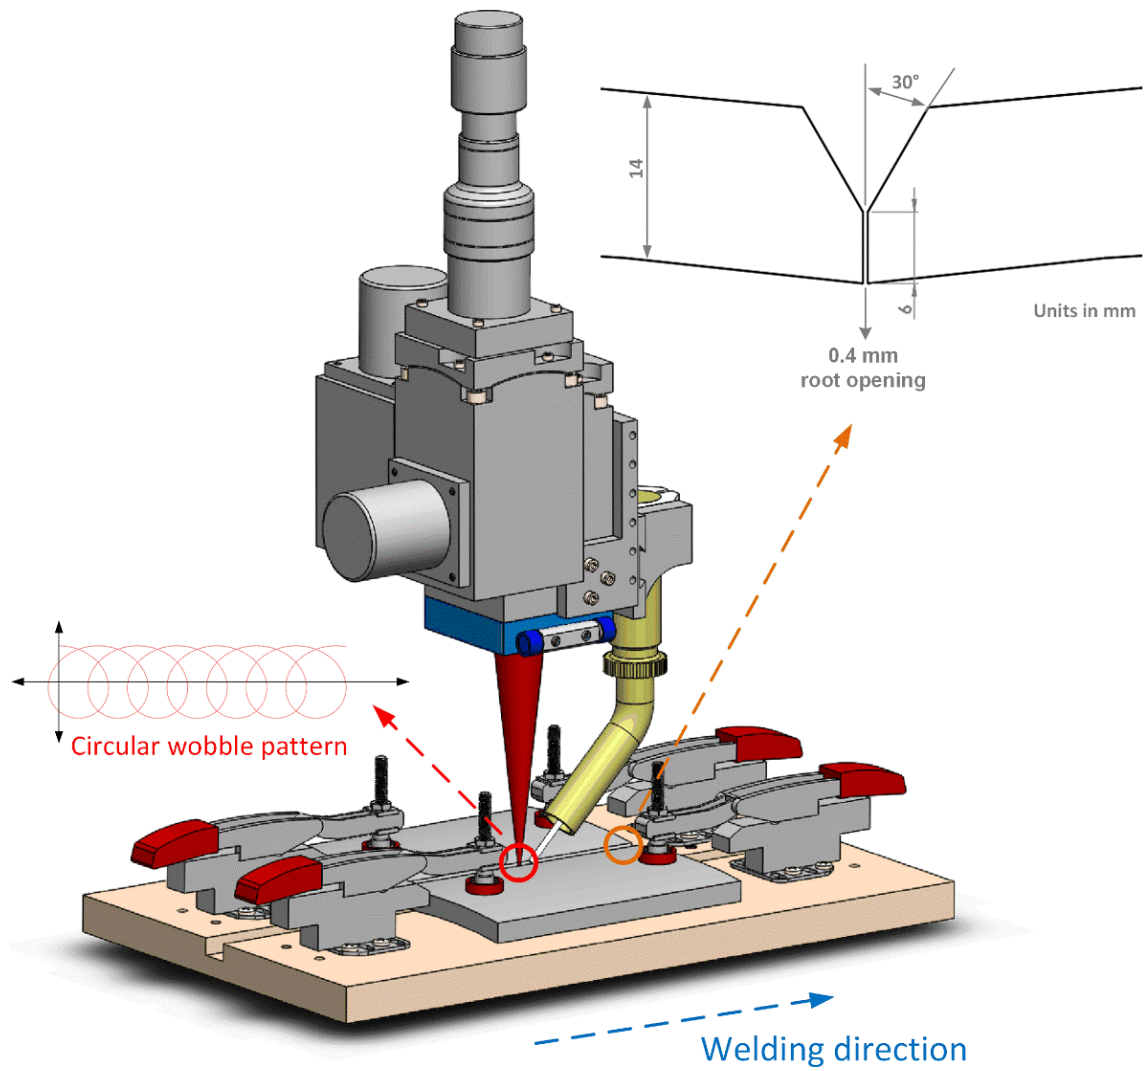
Experimental set-up for wire-fed laser welding with beam wobbling, showing wobble pattern and groove design.
